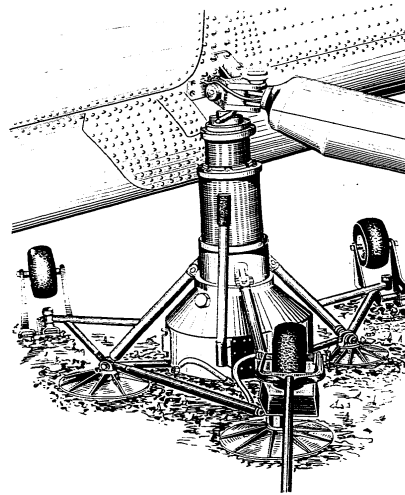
INSTALLING MAIN JACKS UNDER JACKING POINTS OF FRAME No. 22.
